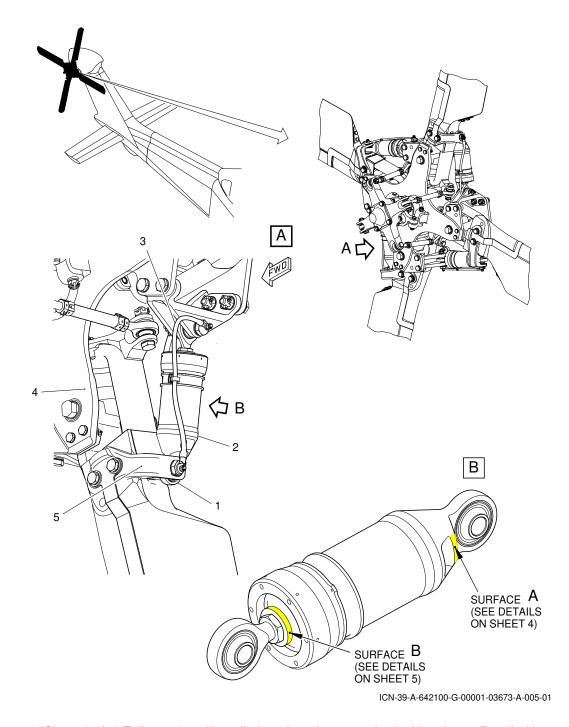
(Sheet 1 of 5) Tail rotor head installation - Lag damper spherical bearings - Detailed inspection on installed lag damper
